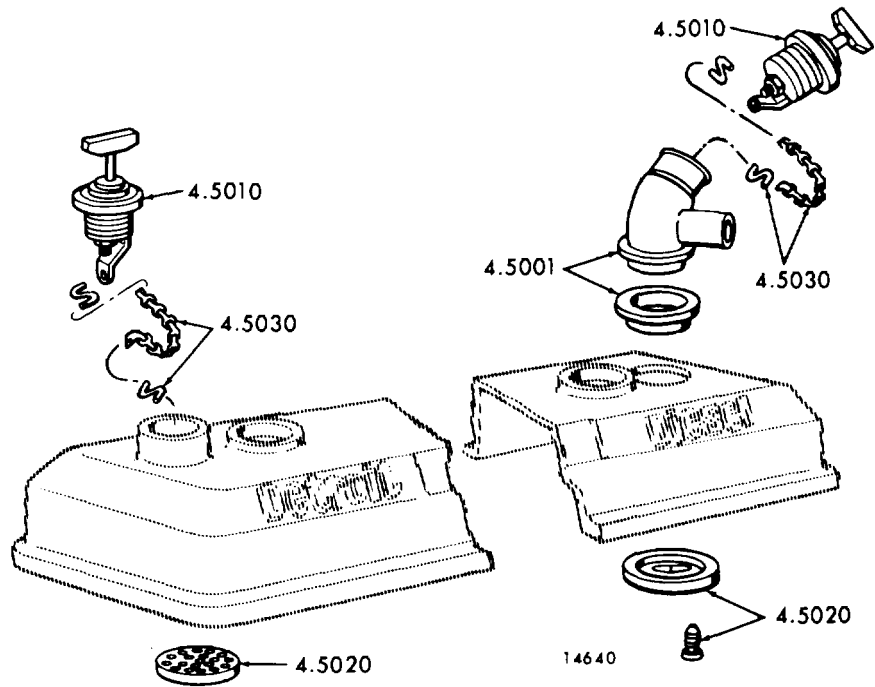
D OIL FILLER CAP (Expansion Type) (Cast Cover)
